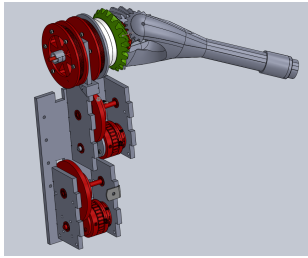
Arm module CAD showing inside view of the transmission; belts not shown.
